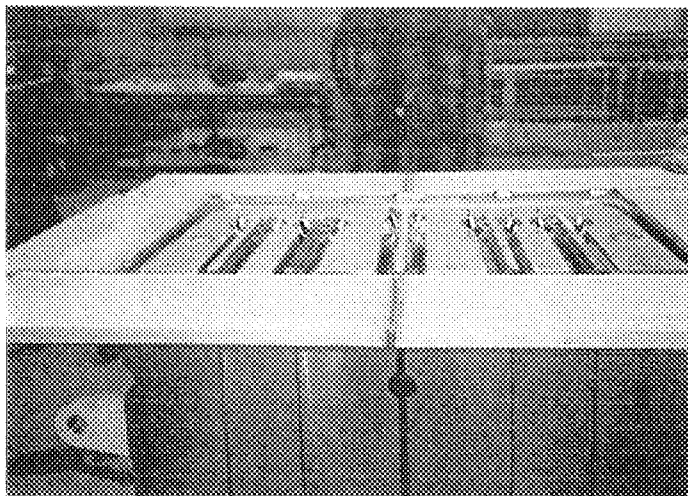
TIG welding of top and bottom header plates
